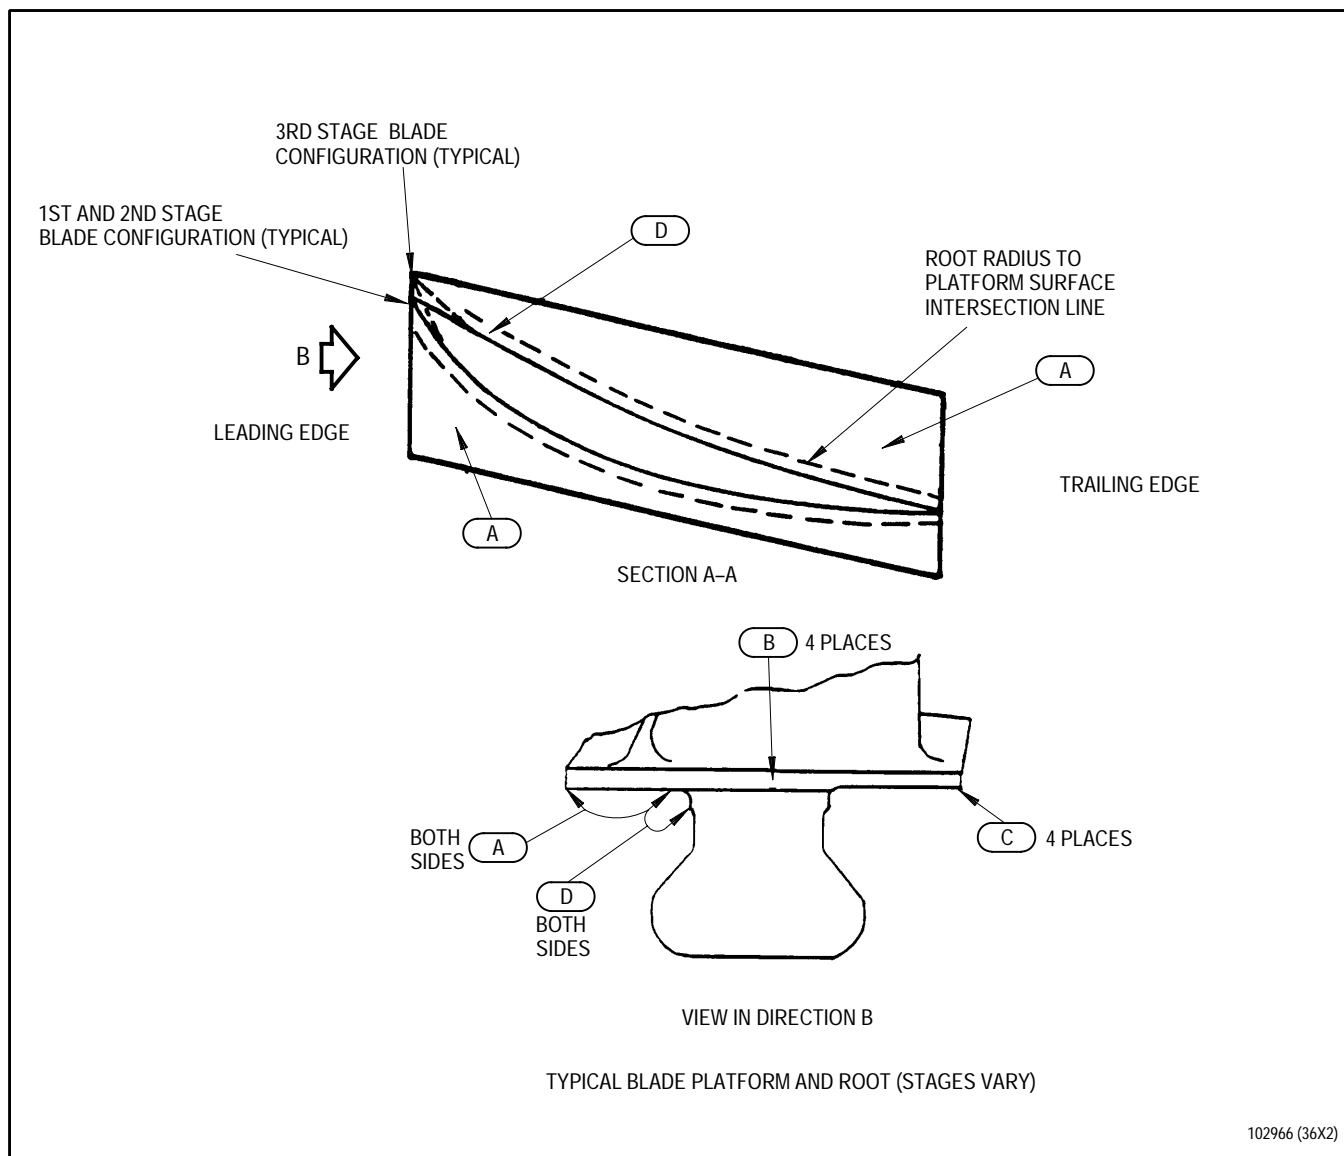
Compressor Rotor Blades (Stages One Through Three) - Inspection (Sheet 1 of 2)
